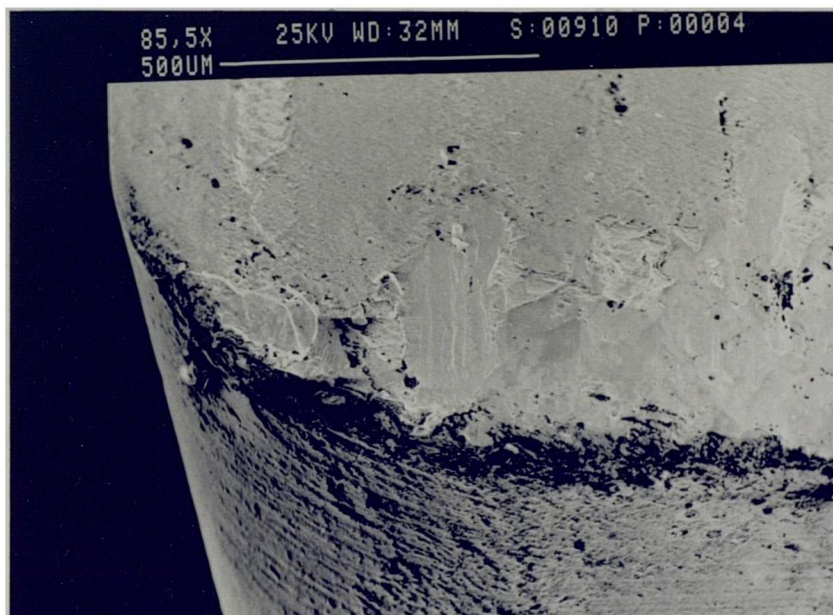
Evidence of fracture at the cutting edge of PCD insert.
